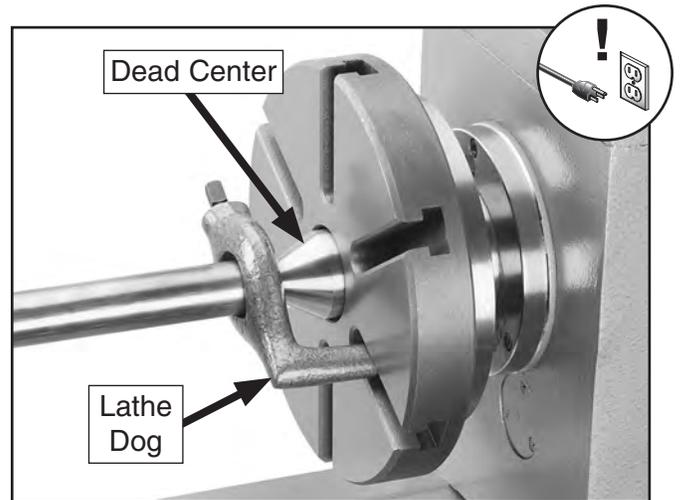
Example of using a dead center with a faceplate and lathe dog.
